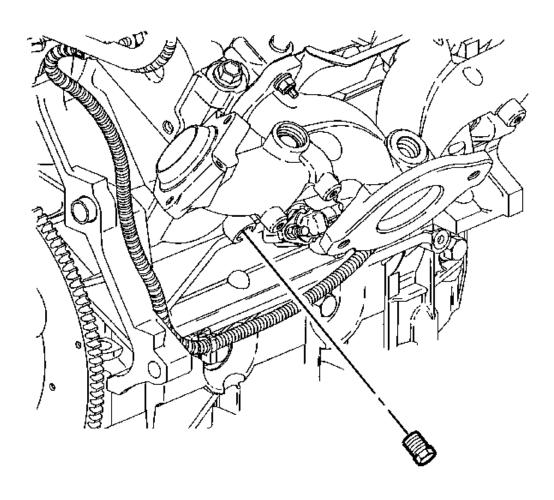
Removing Right Coolant Drain Plug Courtesy of GENERAL MOTORS CORP.
